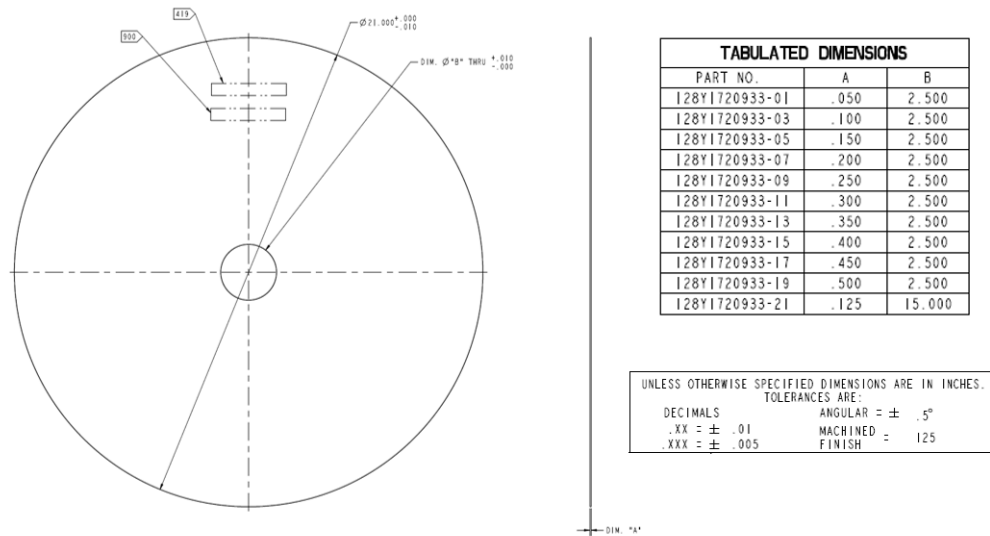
Engineering Drawing (128Y-1720933-D1) of the Al Shims (Dimensions in Inches).
